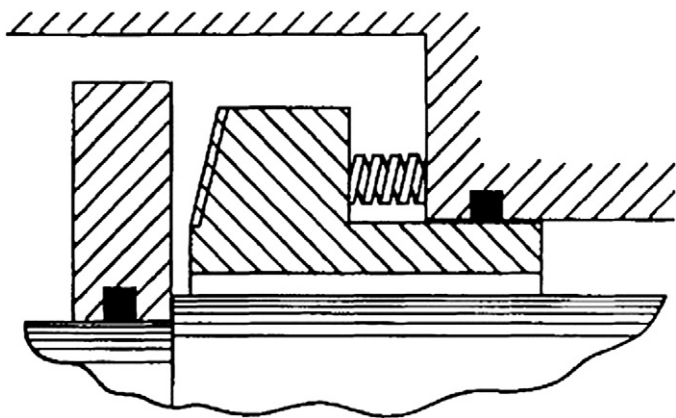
• Typical design for curved face — spiral groove non-contact seal; curvature may alternately be on rotor (Courtesy of John Crane Co.)
